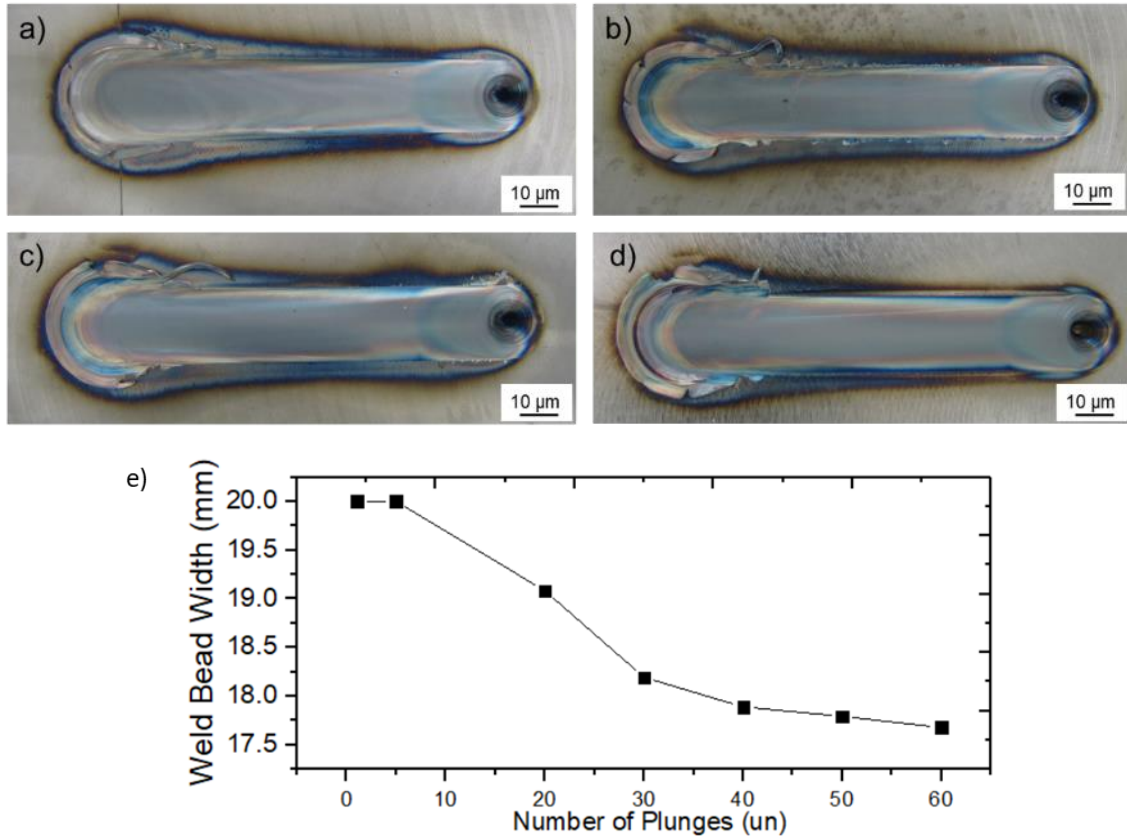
Weld bead superficial view for a new tool a), 20-plunge tool b), 40-plunge tool c), and 60-plunge tool d). e) Weld bead width in plunges performed
